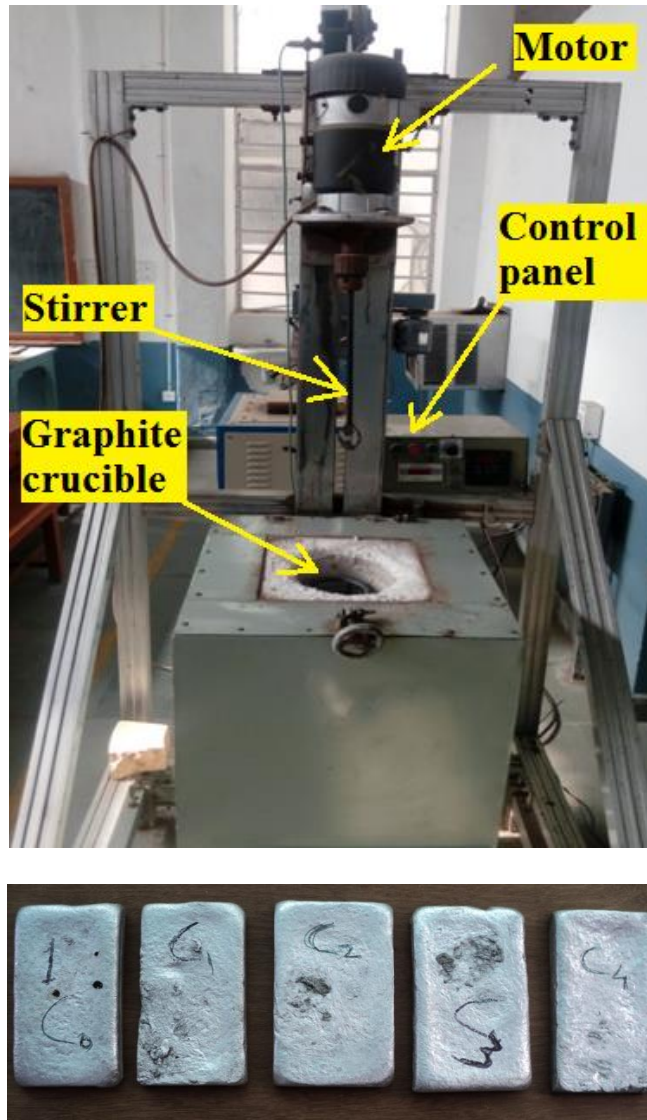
Actual setup to fabricate the AMCs using the stir casting method and five images of casted samples
